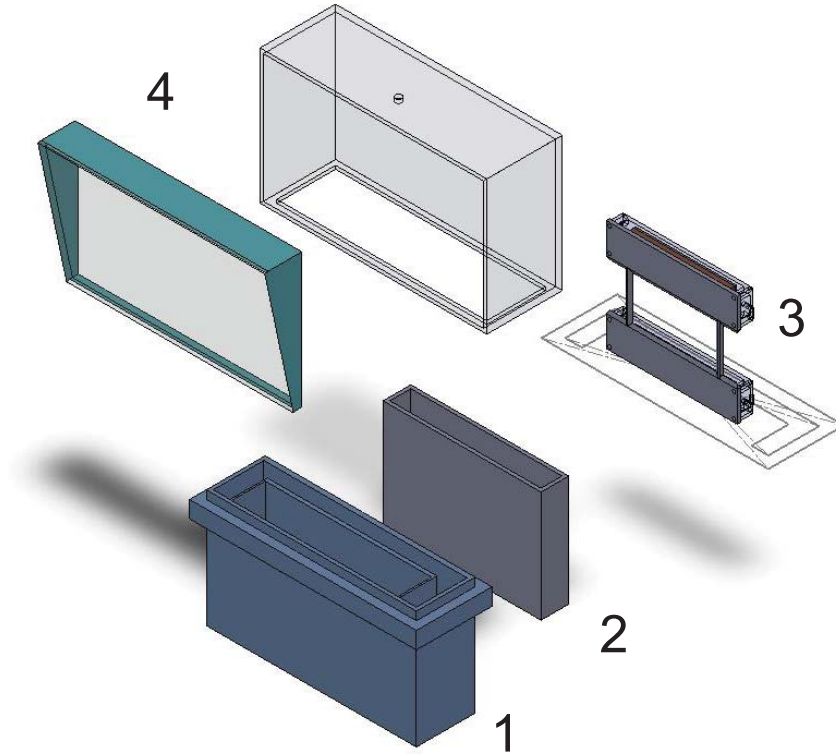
Assembly explosion rendering,(1) container, (2) solution reservoir, (3) frame assembly, (4) top enclosure
